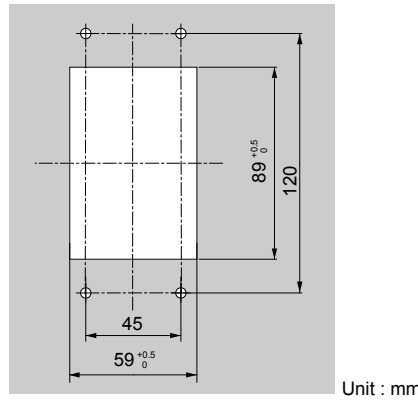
Panel Cut-Out Dimensions (Internal/Flush-Mount Installation)
